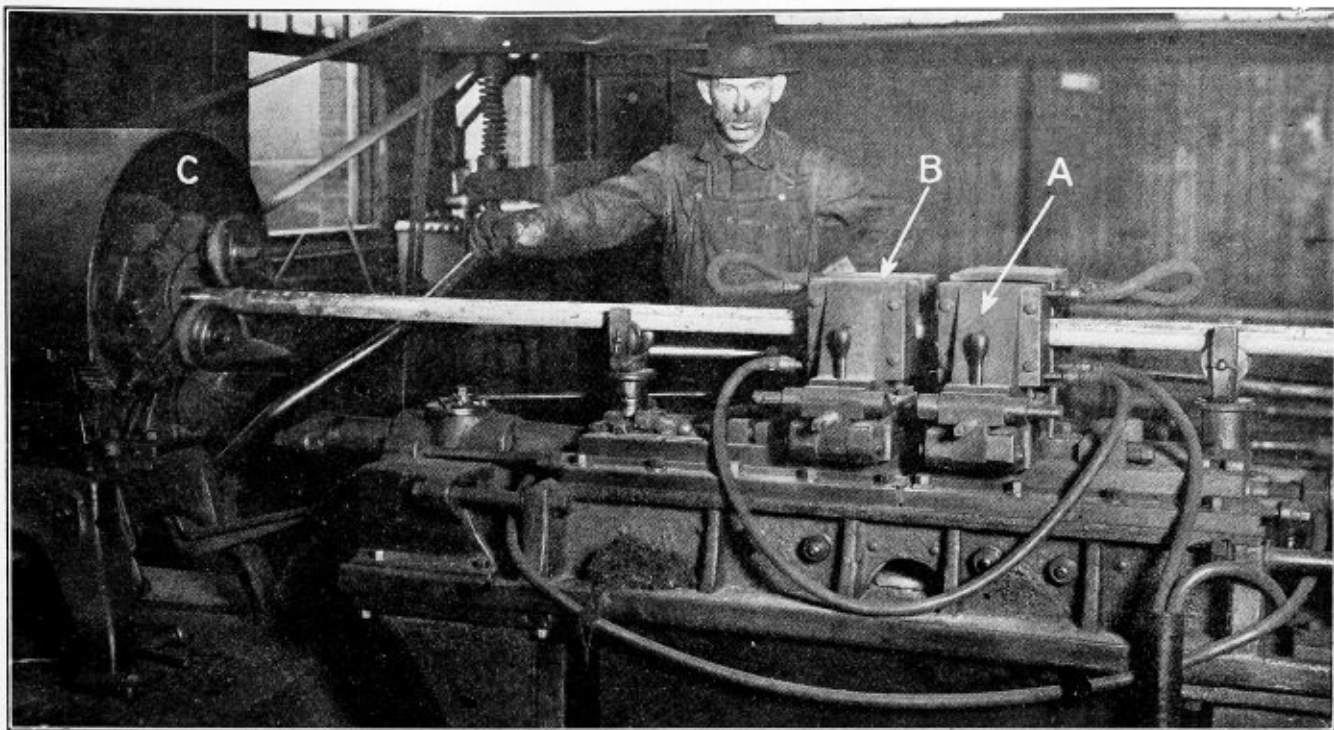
Rolling a Boiler Tube After It Has Been Safe Ended in a Thomson Electric Welder
